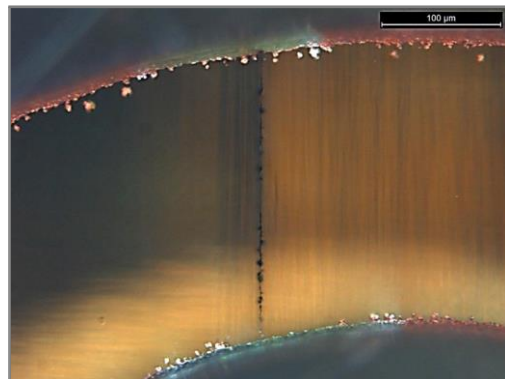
In-plane section of a failed PCB showing a trace of electrical discharge along glass fibers in the clearance of a via through a plane.
